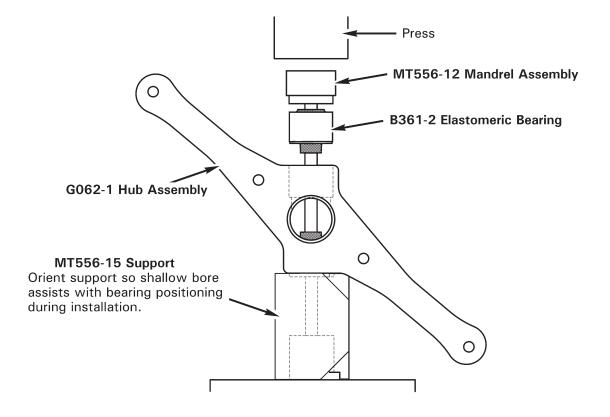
ELASTOMERIC BEARING INSTALLATION
